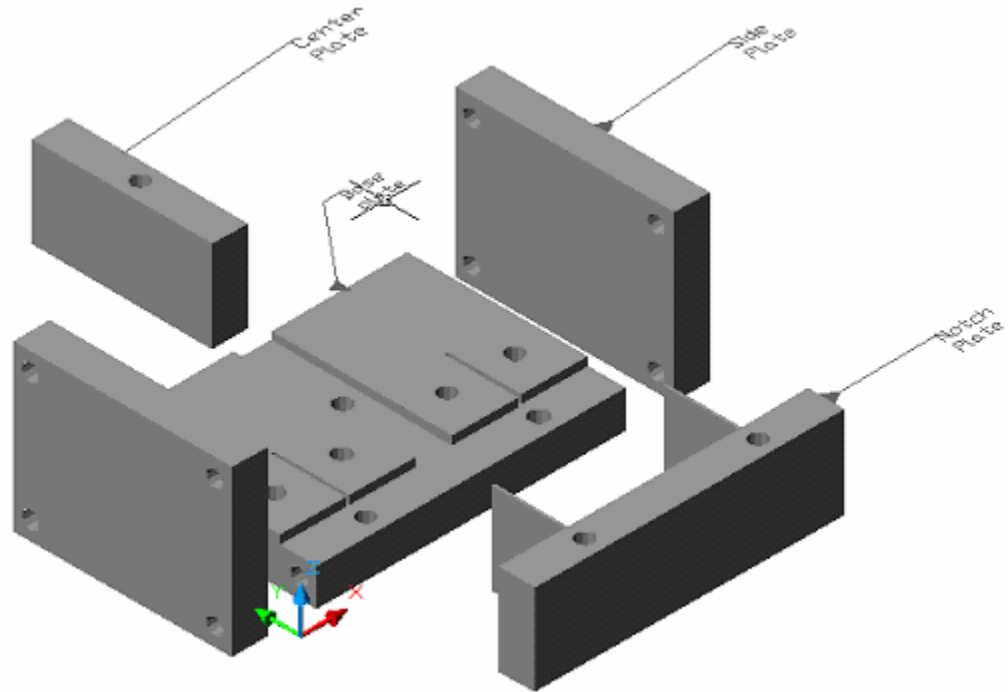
Mold for preparing specimen for Fracture and SEM testing
